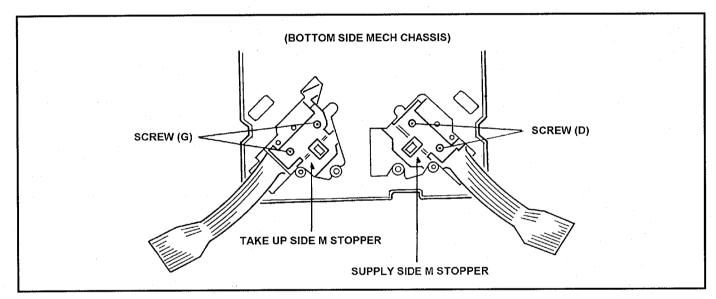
Removal of Supply & Take Reel Rotor Unit
